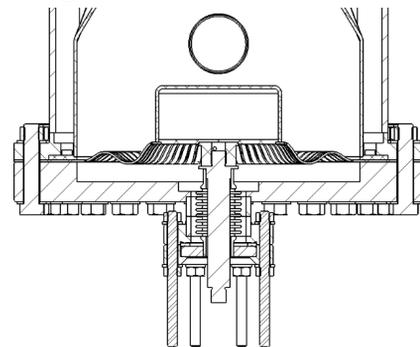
a mechanical drawing of the bottom of a  $\beta=0.041$  cavity.
